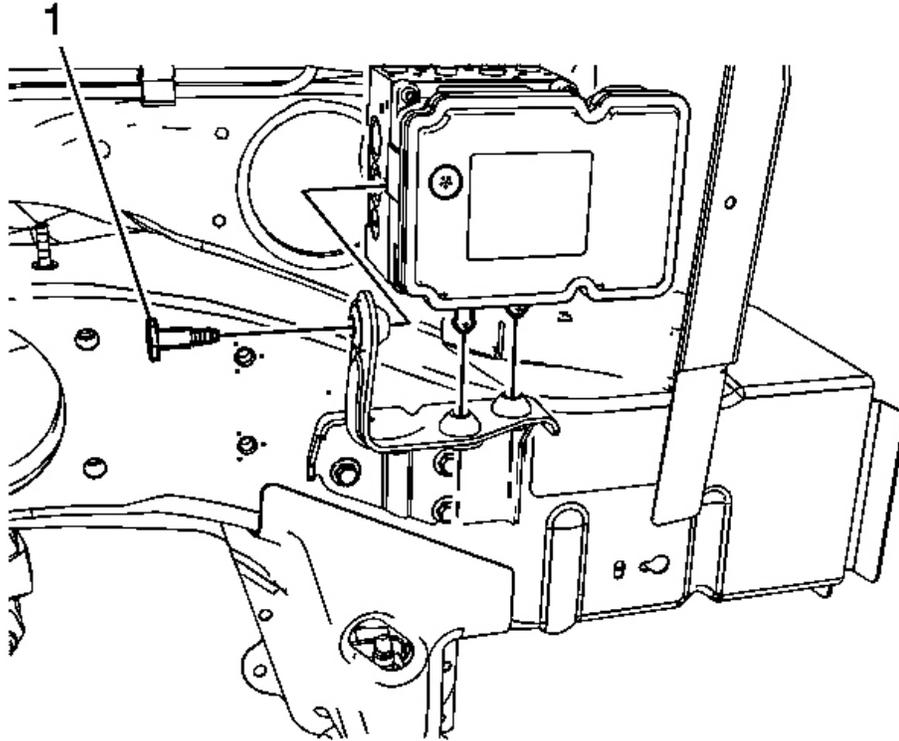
Brake Pressure Modulator Valve (BPMV) Bolt
